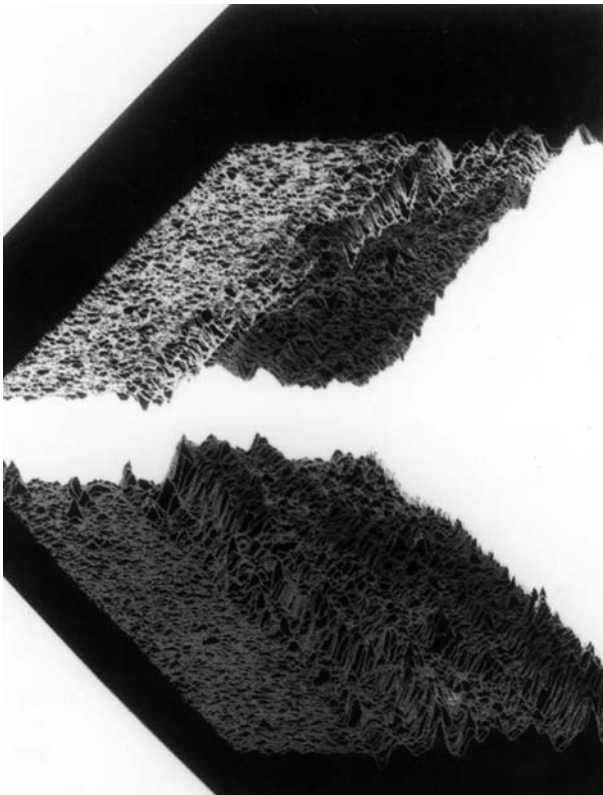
Perspective view of conjugate fracture surfaces. Source: Ref 11
